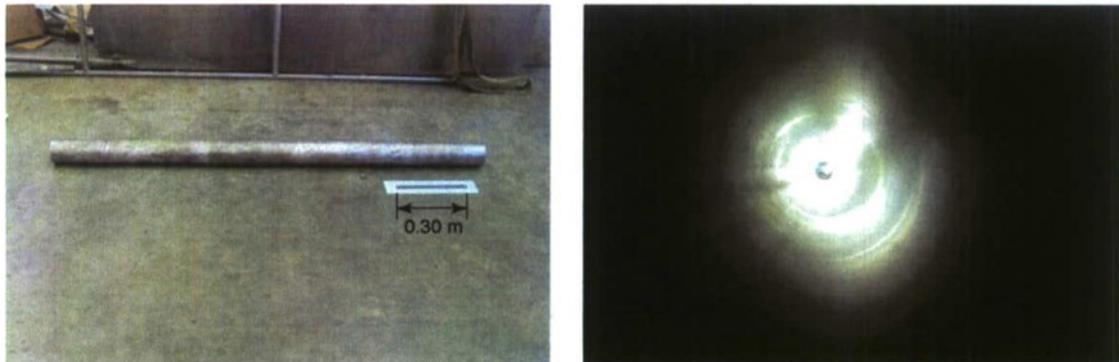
On the left is shown a photograph of the heavy-walled impedance tube during machine shop operations. The 0.30 m length machinist's rule indicates the size of the tube, which is 1.83 m in length. On the right, the view down the center of the tube is shown, illuminated from the far end with a flashlight, after gun drilling and honing. Note the smoothness of the inner tube wall.
